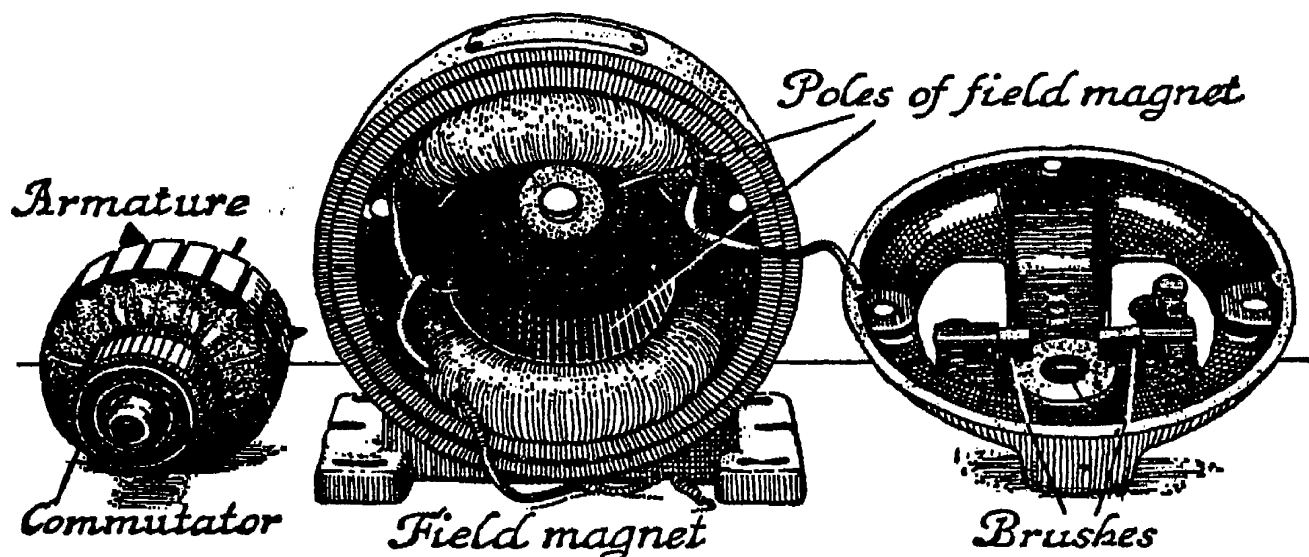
The parts of a small motor, showing the field magnet, armature, commutator, and brushes.
